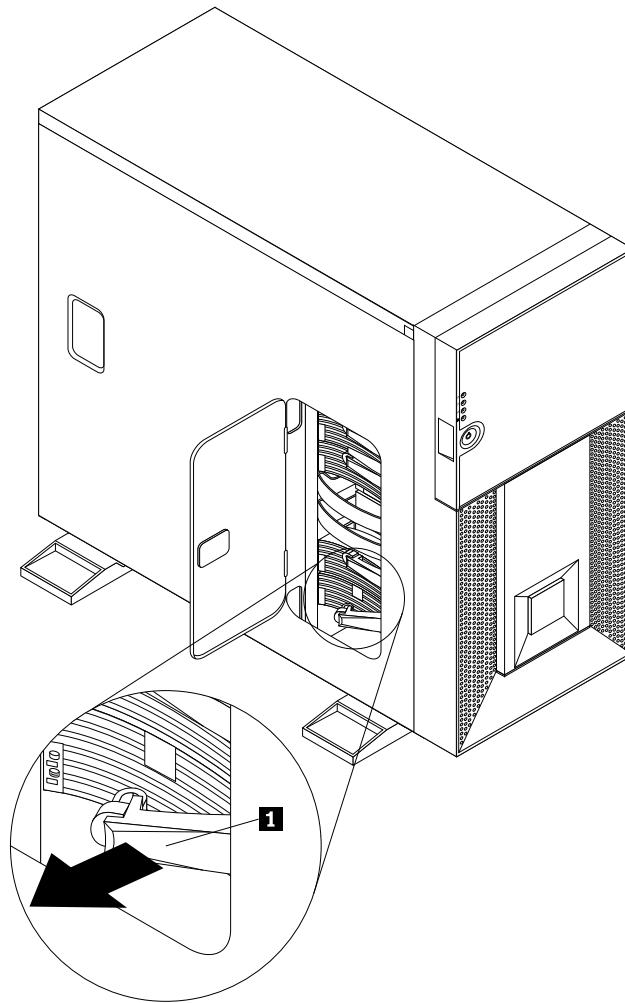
Removing the hot-swap hard disk drive bracket with the hard disk drive
